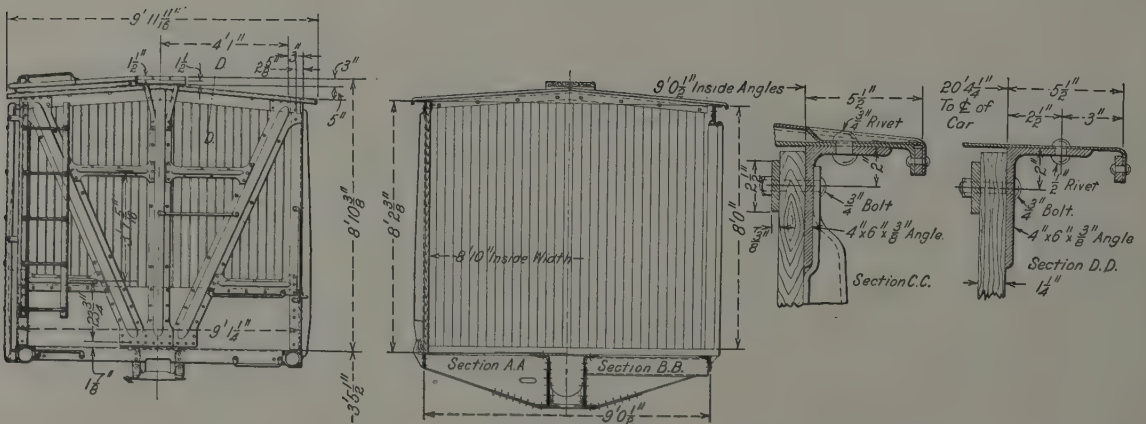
End Elevation and Cross Sections of Pennsylvania Steel Frame 50-Ton Capacity Box Car. The Dotted Lines at Top of Section "CC" Show Opening in Steel Roof Extending Between Carlines for Ventilation. See Figs. 20 and 22.
